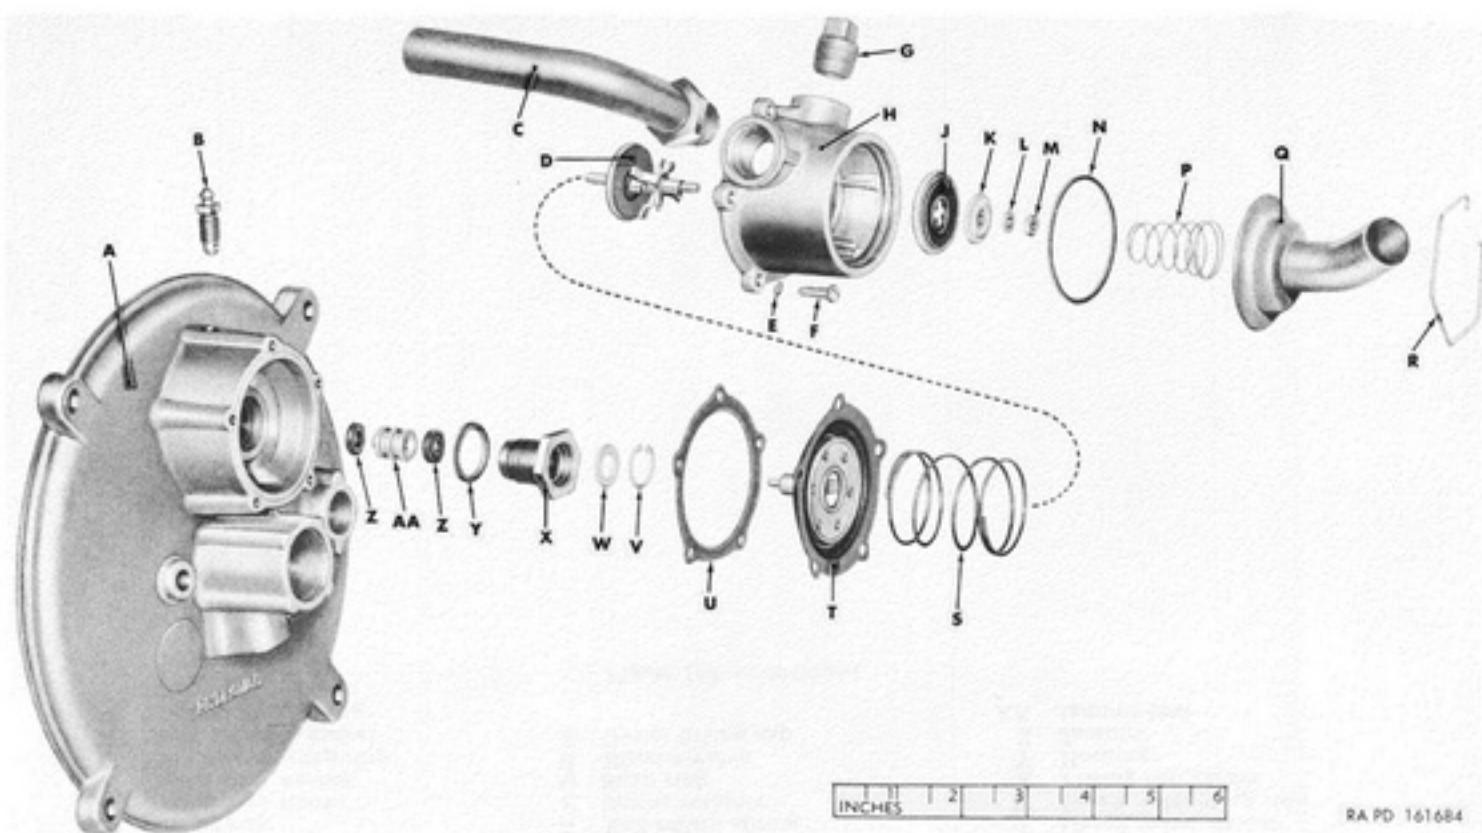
Vacuum-hydraulic power piston (third series Hydrovac) control valve—exploded view.
